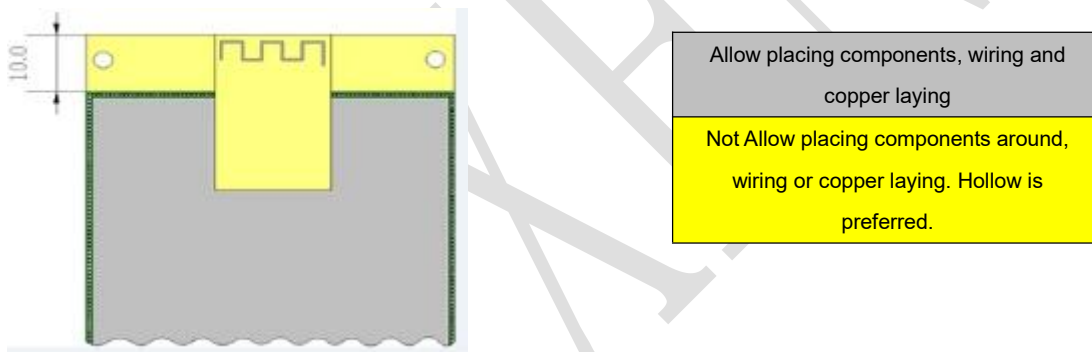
Schematic Diagram of PCB Layout for Module Antenna Position Selection
